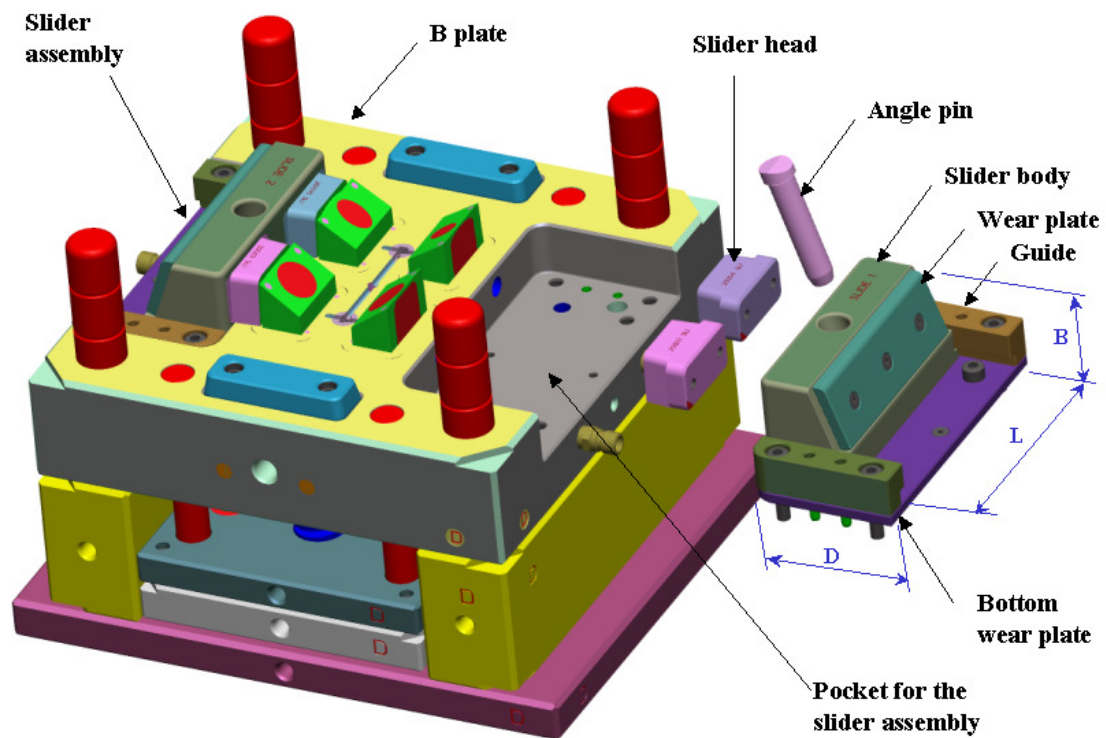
The overall size of a slider assembly (Courtesy: Luen Shing Tools Limited)
